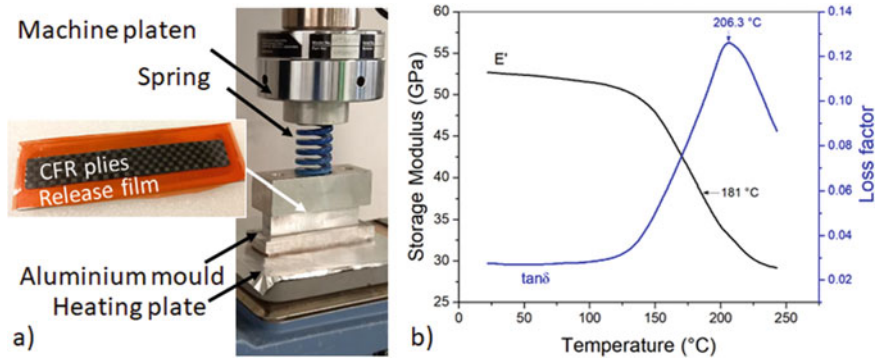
Compression moulding configuration of CFR composite samples (a) and DMA test of a CFR laminate (b)
